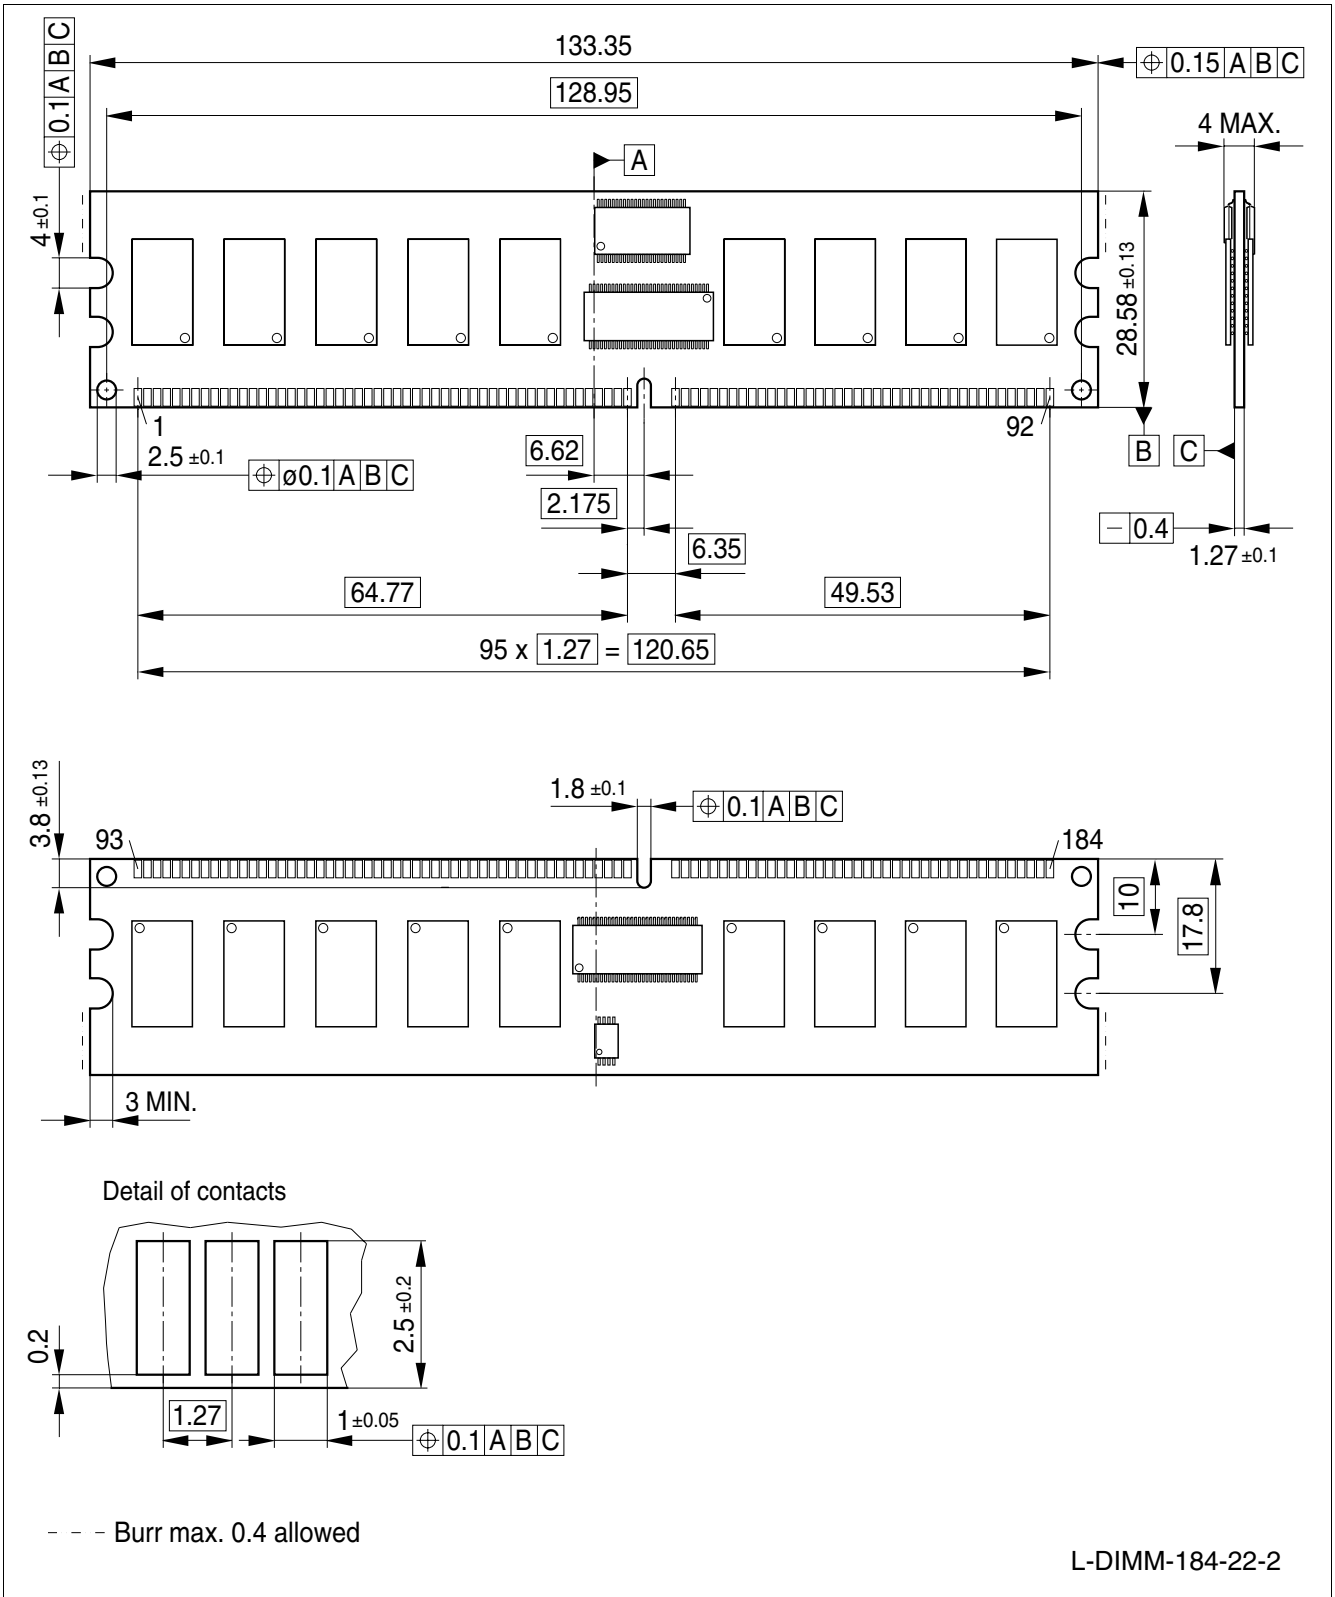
Package Outlines – Raw Card C HYS72D64300GBR-[5/6]-C (1 Rank x 4)
